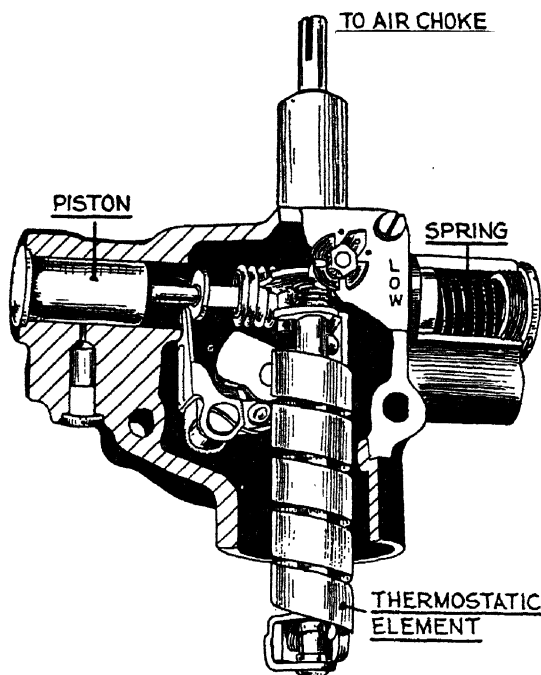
Thermostatic Choke Control fitted to Buick Carburettor.
